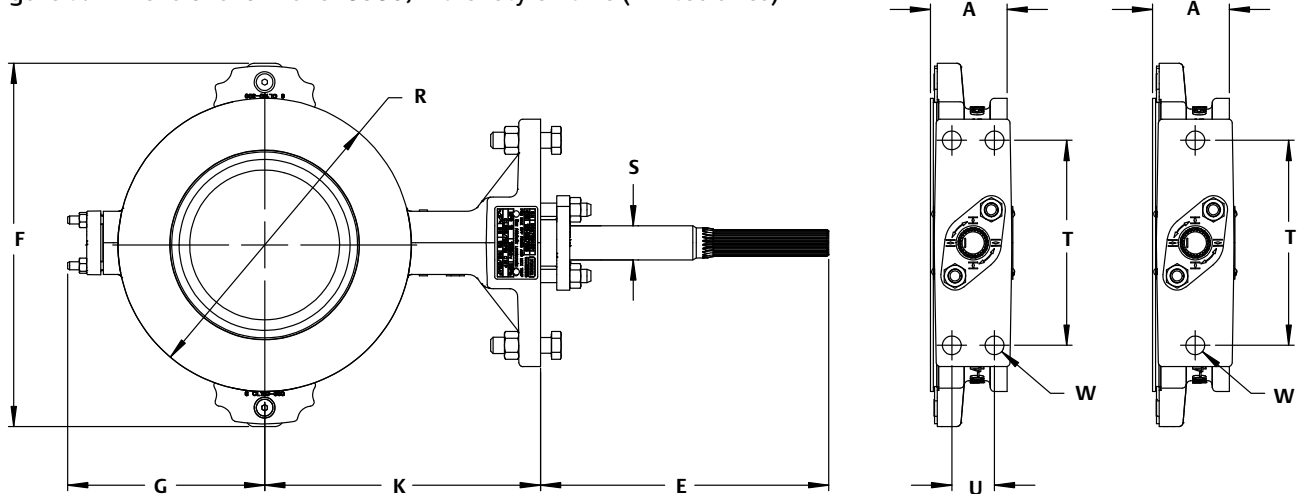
Dimensions for Fisher 8580, Wafer Style Valve (limited sizes)
